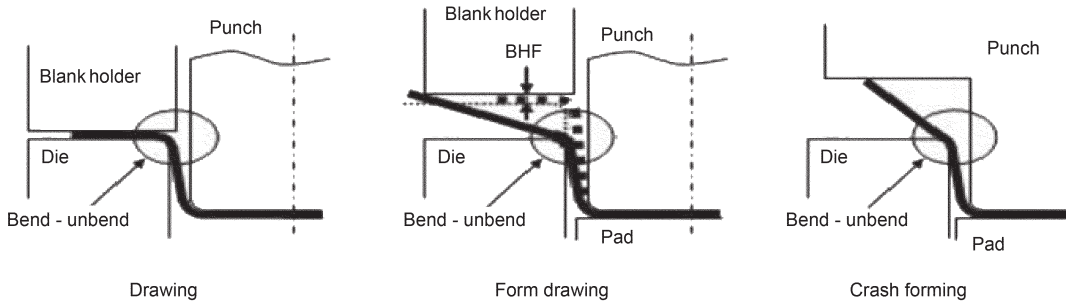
Schematic of the drawing, form drawing, and crash forming process investigated to reduce springback in forming advanced high-strength steel. BHF, blank holder force. Source: Ref 6.3
